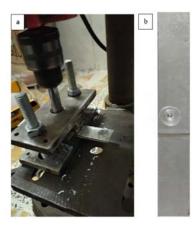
Joining process: a) fixtures of the specimen; b) the specimen
